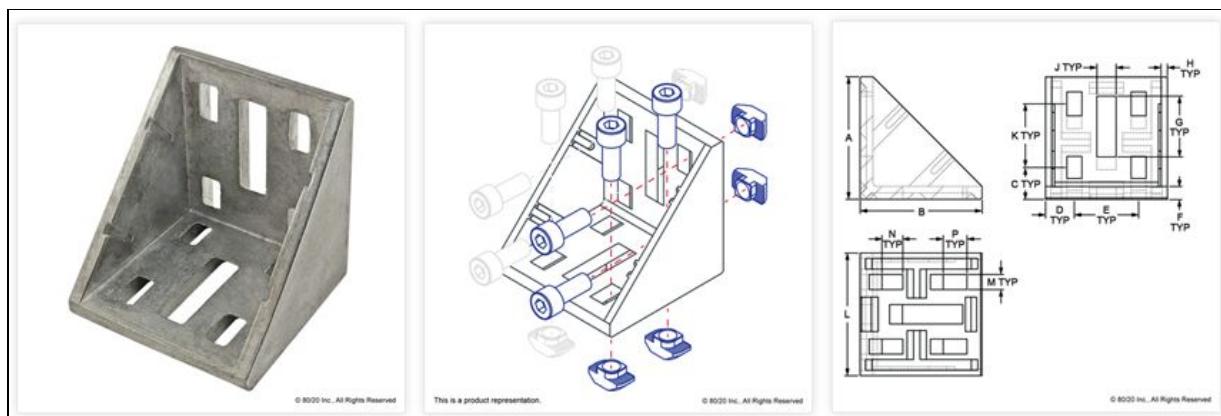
80/20 Floor Mount Bracket P/N 14095
